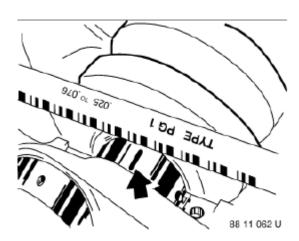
Locating Bearing Play Courtesy of BMW OF NORTH AMERICA, INC.
